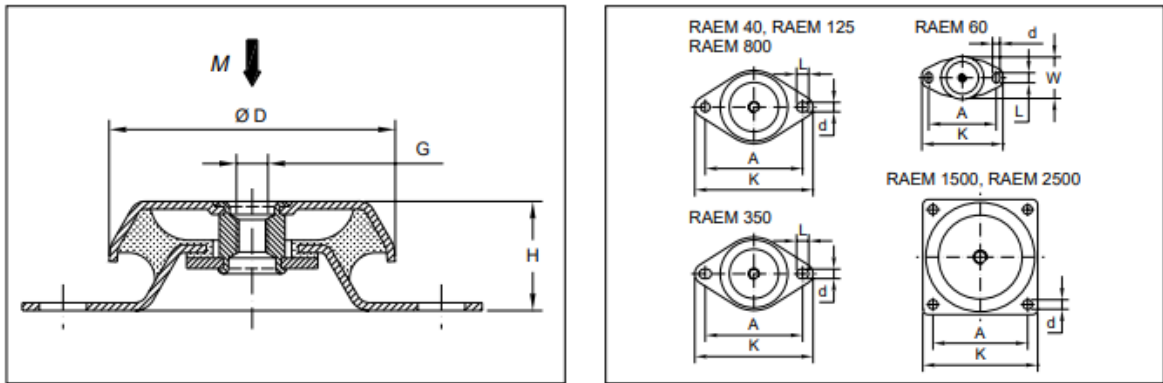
Technical drawing of RAEM. (Costa, 2013)
